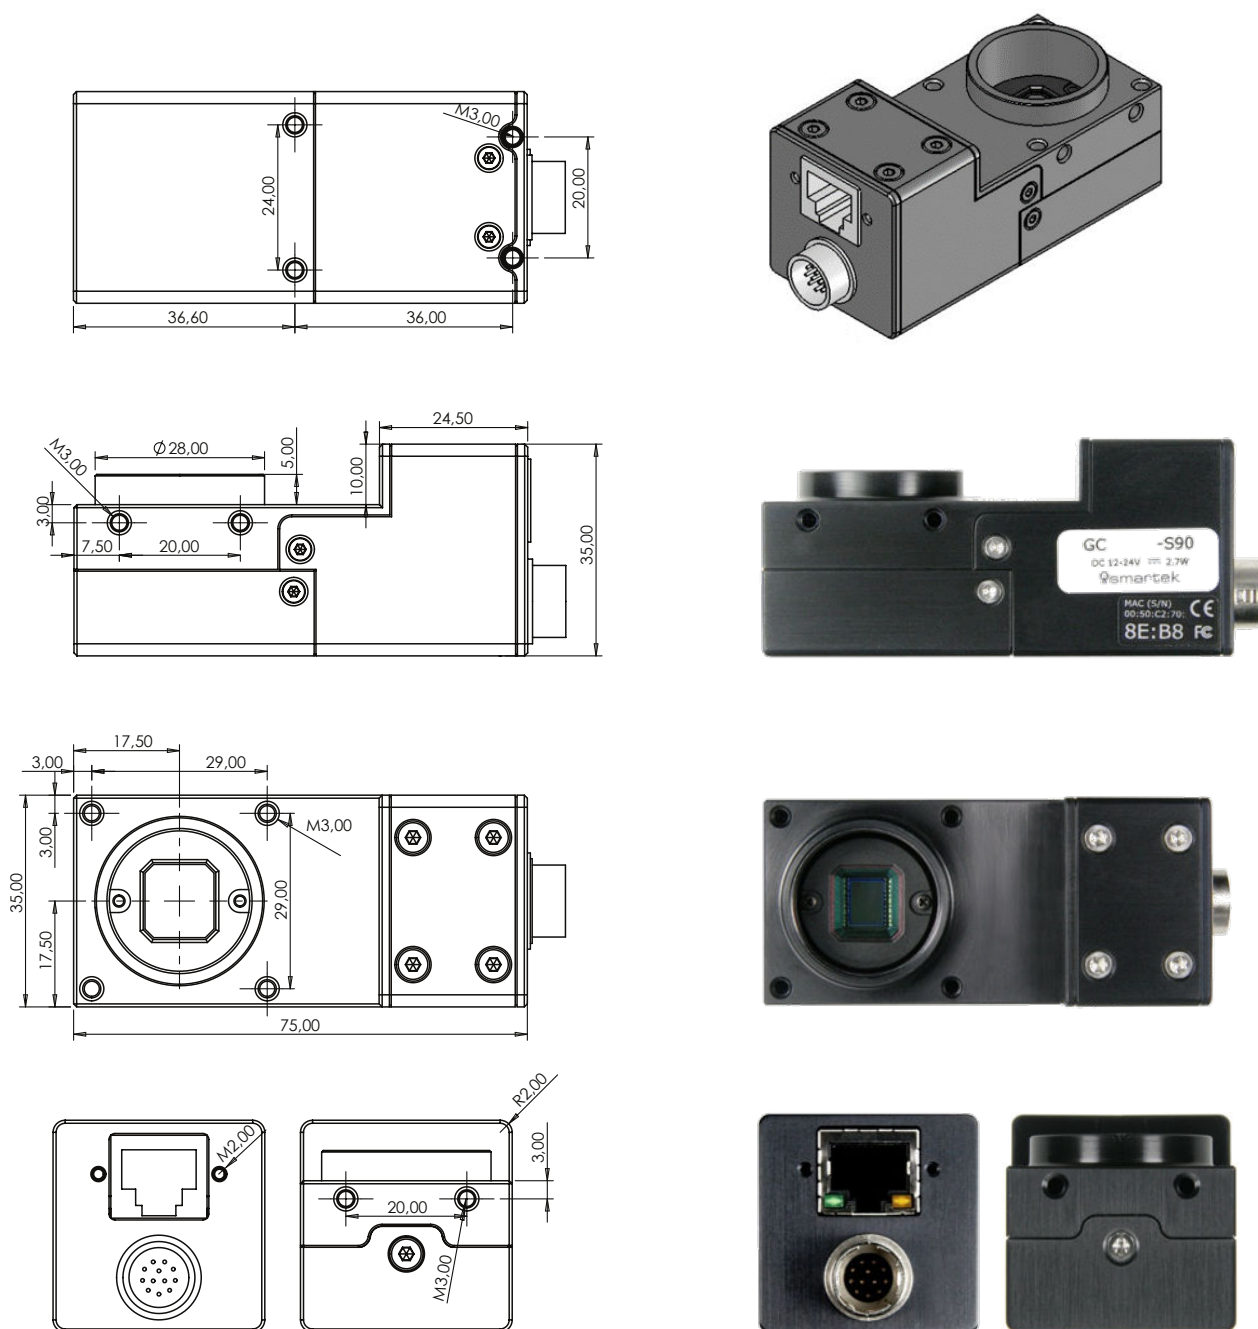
Technical measures of angled 90° camera housing (all dimensions are in mm [inch])
